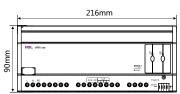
Dimensions - Front View (HDL-M/D02.1)
